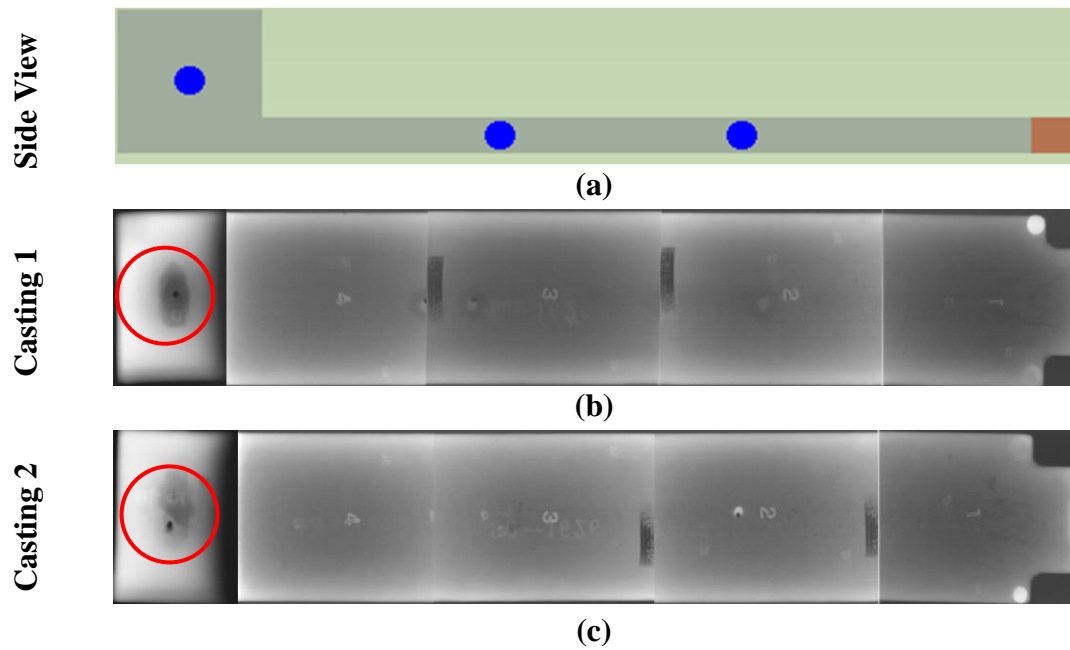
Experiment 3: (a) schematic showing the location of thermocouples in casting, (b) Radiographic image of casting 1, (c) radiographic image of casting 2
